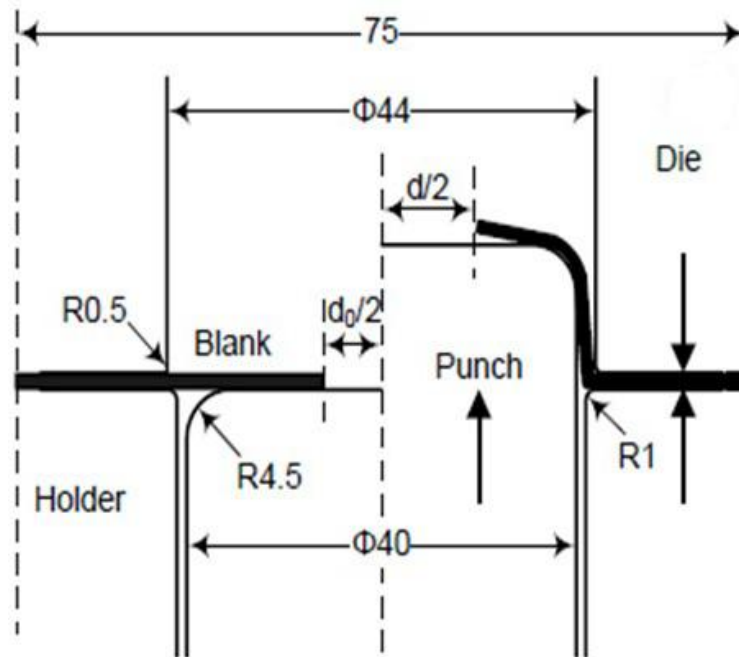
Schematic of hole expansion test using flat bottom punch (dimension in mm)
